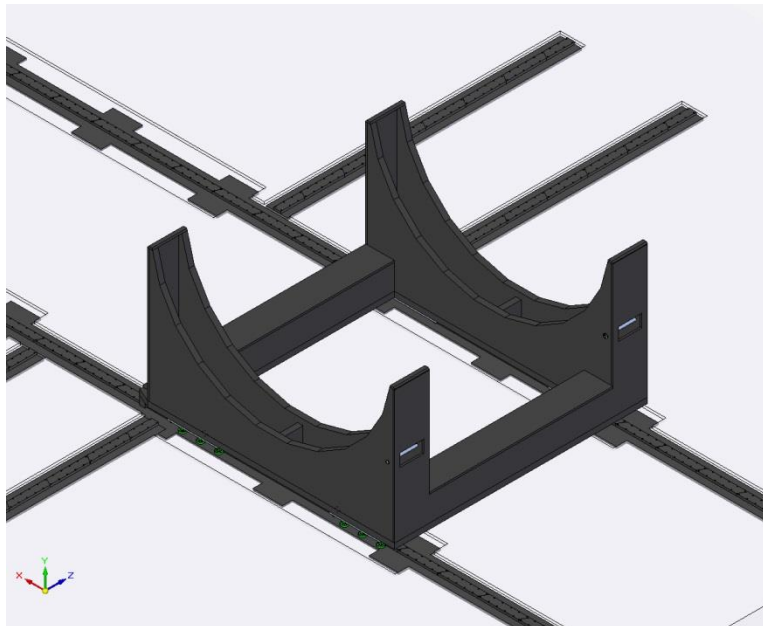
Magnet cradles put on the roller skates
